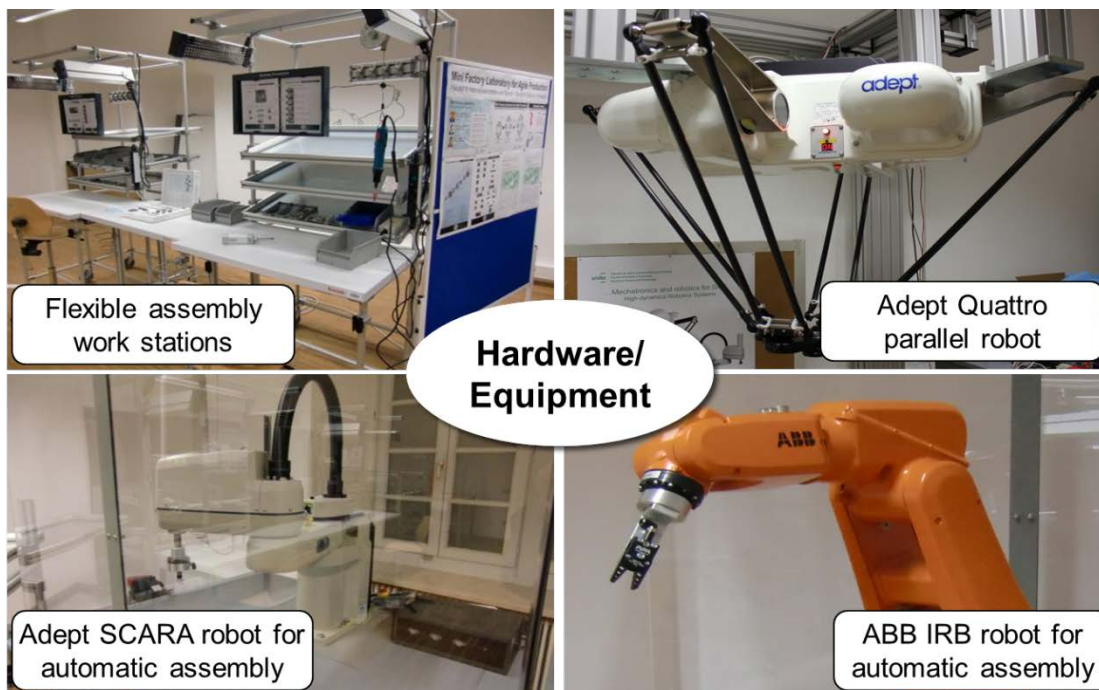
Mini-factory-laboratory – basic hardware equipment and software tools for industrial assembly
